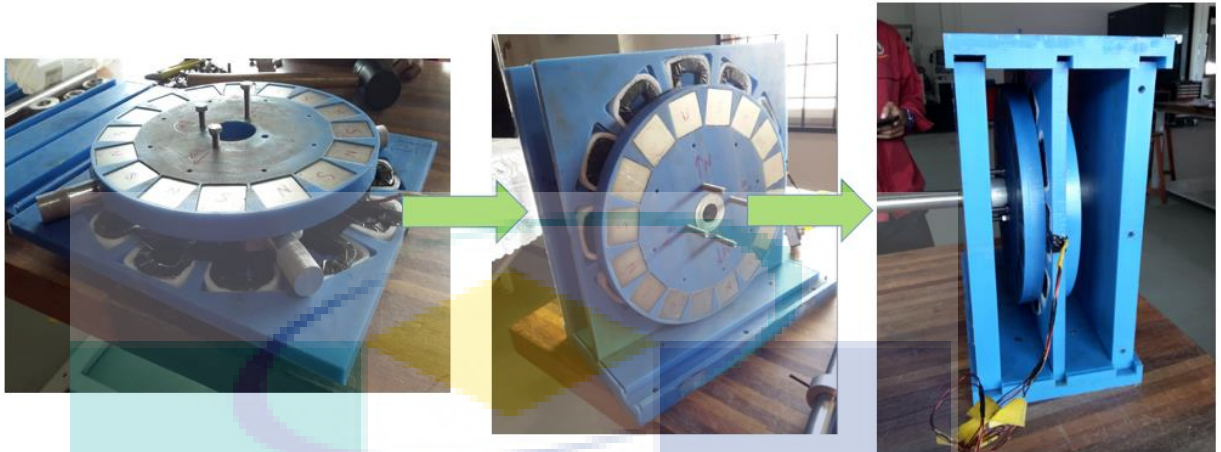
Sequence process for assemble prototype ironless coreless generator
